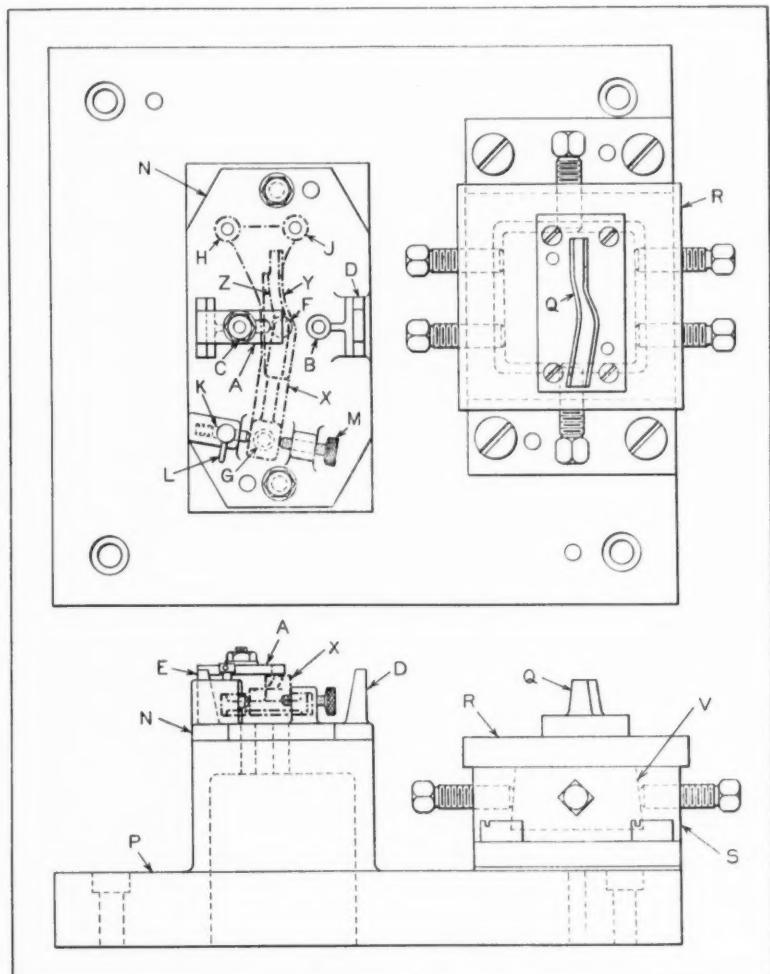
Fixture for Profile-milling on Two Sides of Work
